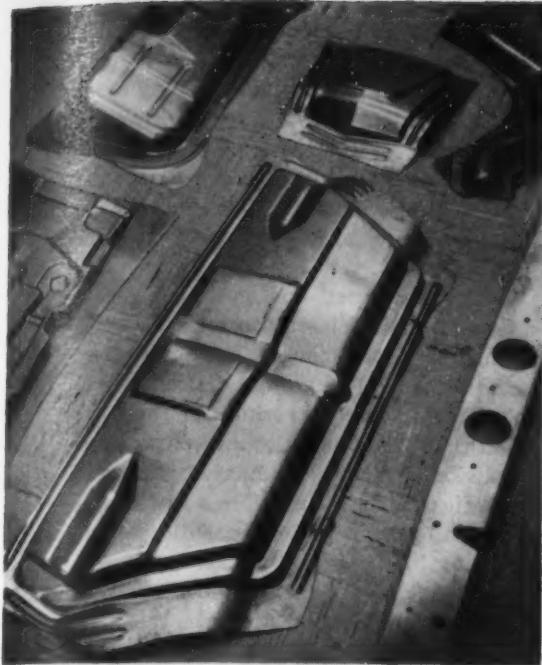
Shown in the photograph are typical metal stampings made with plastic dies. Inside door panel (left), one-half size experimental hood (rear center), gas tank (rear left), air duct (rear right), instrument panel (right), and cowl side panel for trucks (center).
